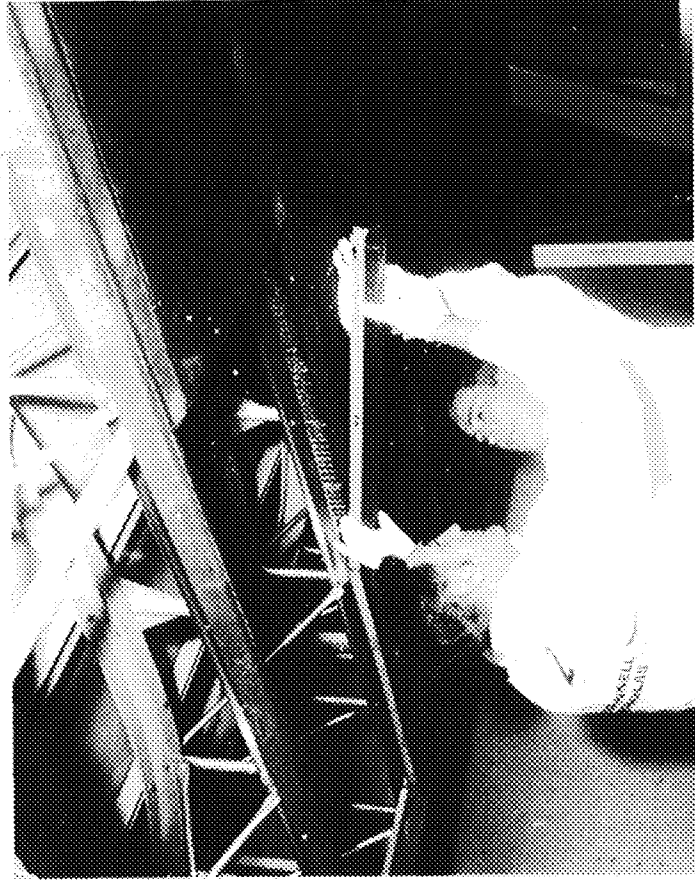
INSTALLATION OF PI-STRAP ASSEMBLY
